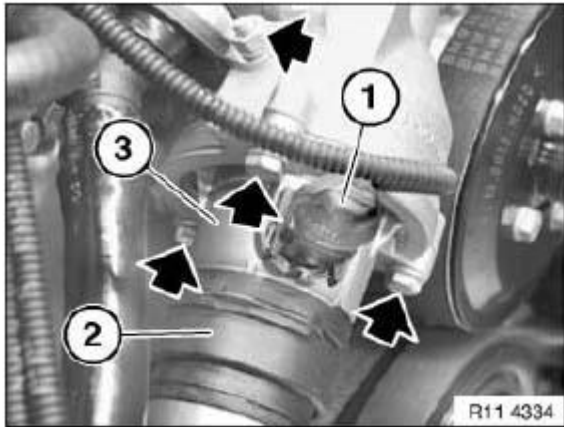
Identifying Coolant Thermostat And Hose With Plug Connector
